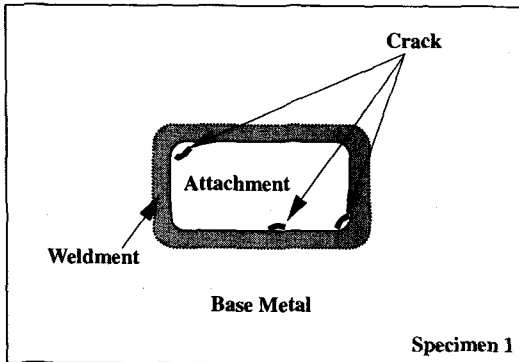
Crack locations in the heat affected zone of the mock-up specimens
